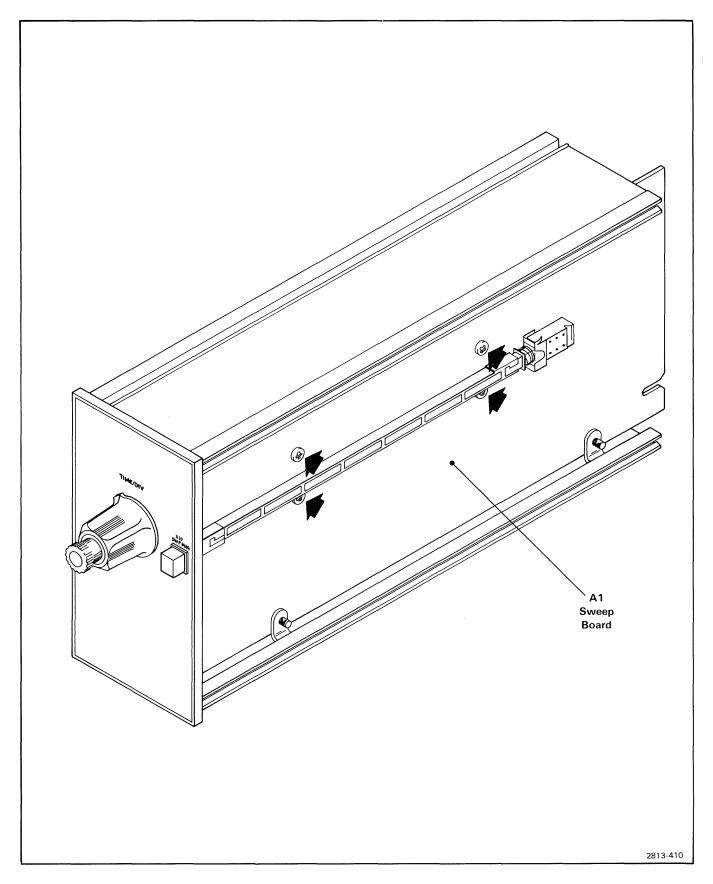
Location of four screws that retain the cam-switch bearing-blocks to the Sweep Board.
